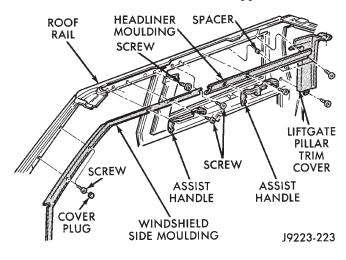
Headliner Trim Mouldings—XJ Vehicles
